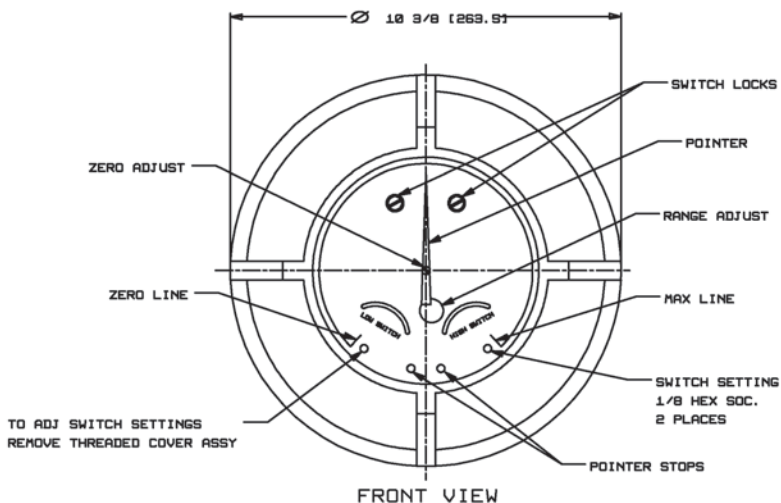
Model 291B Outside Dimensions (Part 2 of 2)
